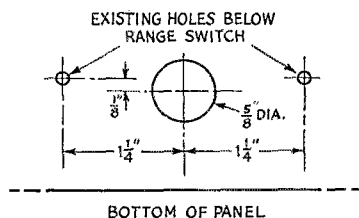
Location of mounting hole for r.f. output connector (Js) from signal generator.
